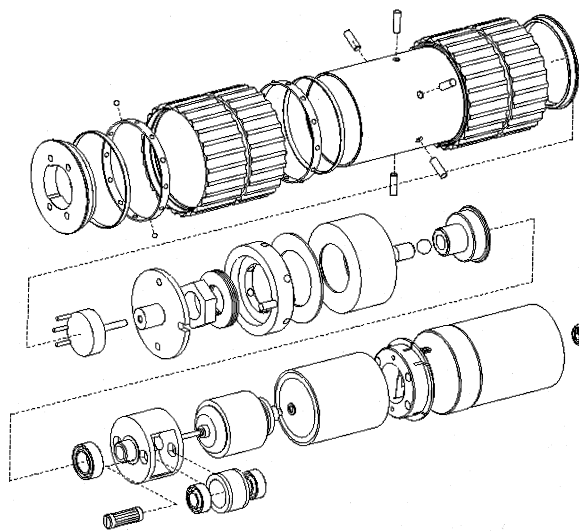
Assembly diagram of the planetary harmonic lifter mechanism, showing the planetary rollers, motor/brush assembly and flexspline (bottom row), potentiometer, overload clutch and spline ring (middle) and tubular housing with external idler sprockets and ball bearings (top).
